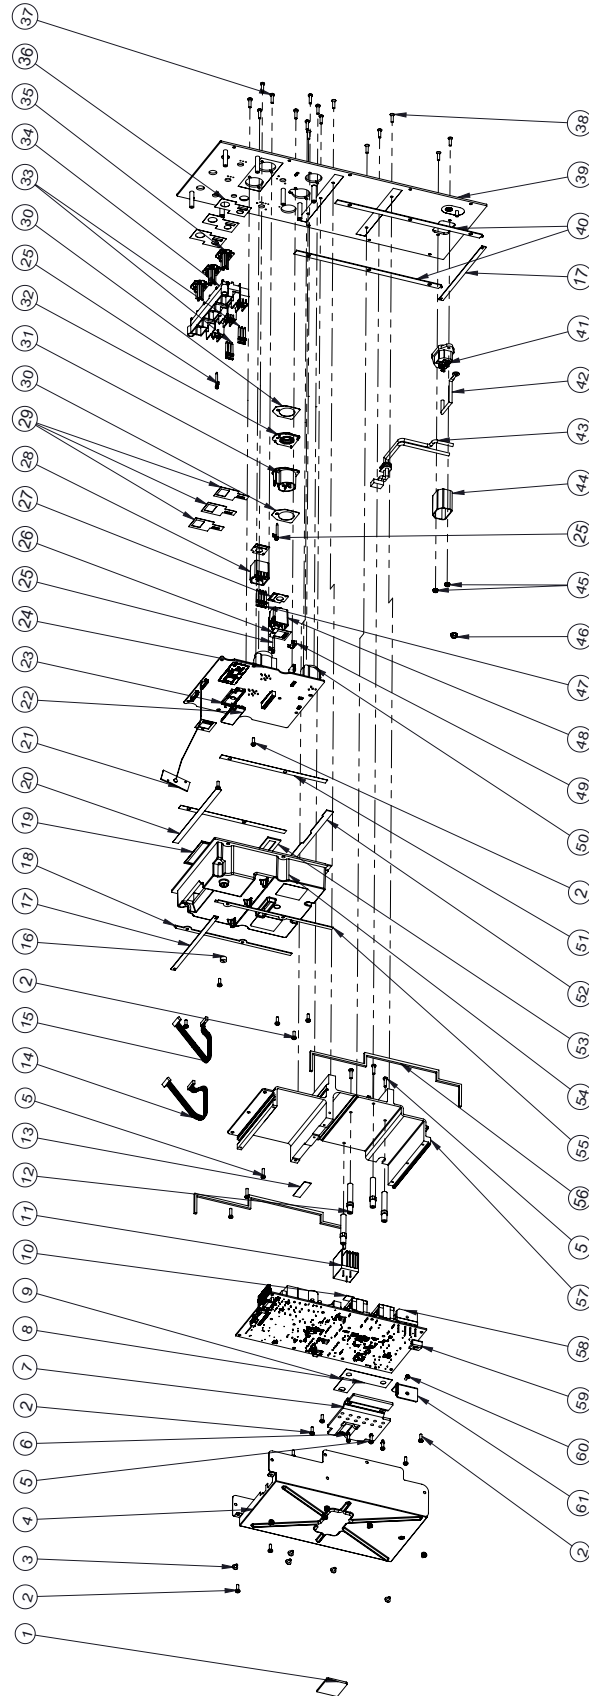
L1 Pro8 I/O Panel Assy Exploded View
